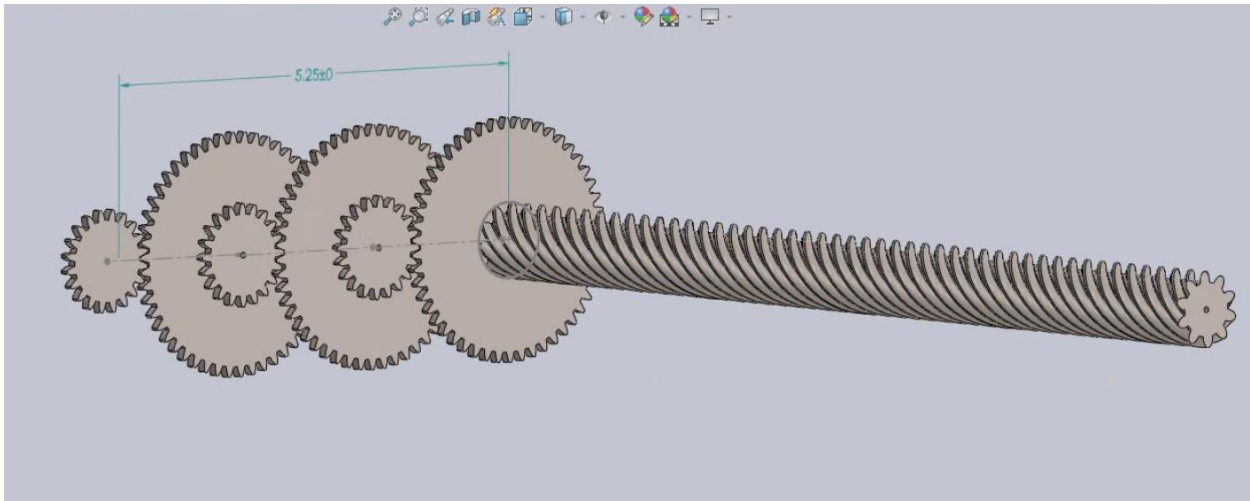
Oblique View of the Initial Compound Gear Train Design.
